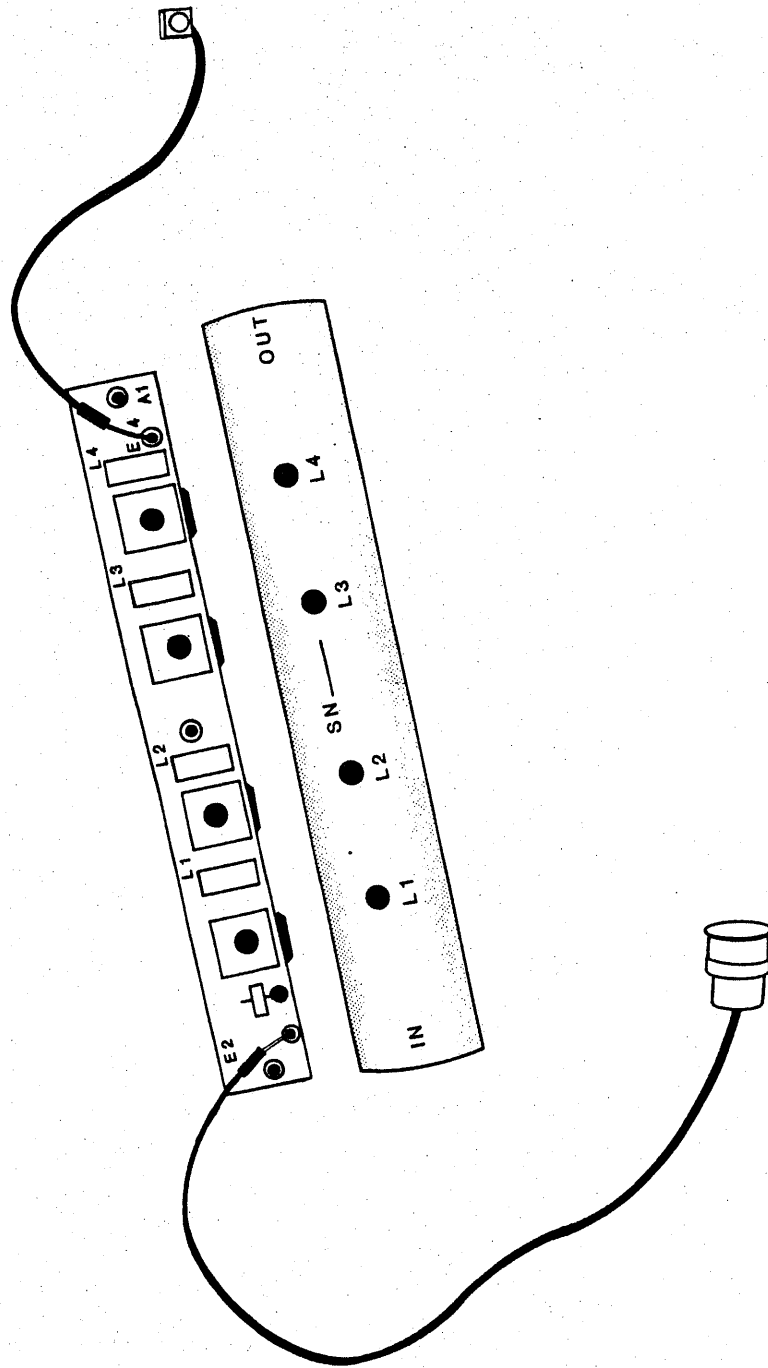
Low Pass Filter Circuit Card Assembly (A1)
